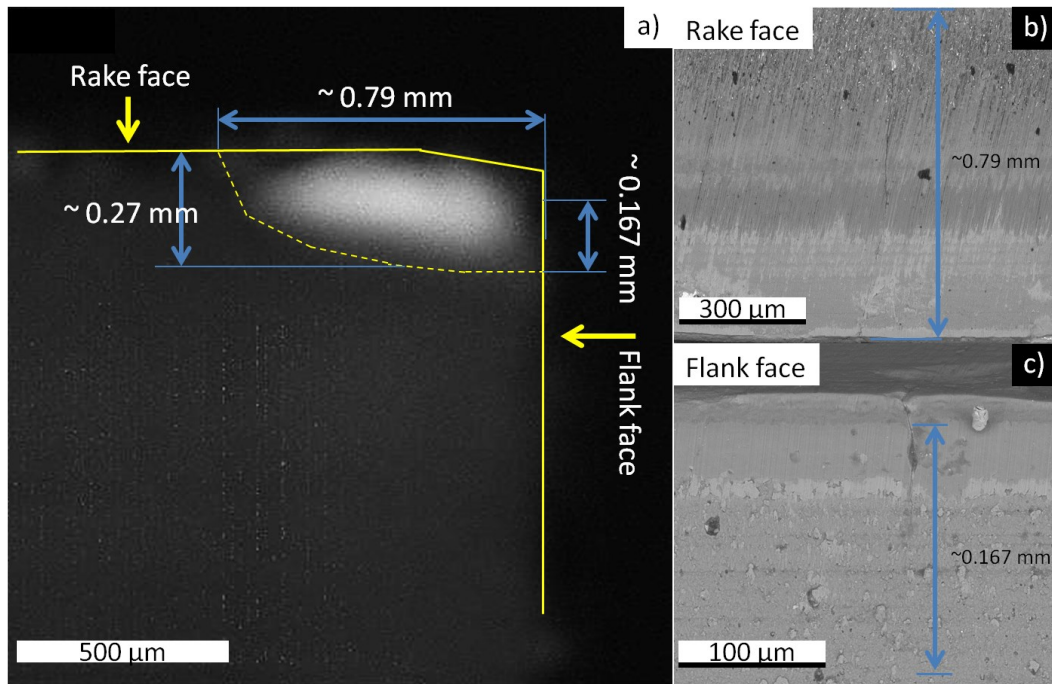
a) Scanning acoustic microscope image of the combcrack within the milling insert, which had cut 611.7 m aTWCL under test setup B conditions and in which the first combcrack appeared. b) SEM image of the rake face including the dimension of the first combcrack, and c) SEM image of the flank face with the dimension of the first combcrack.
